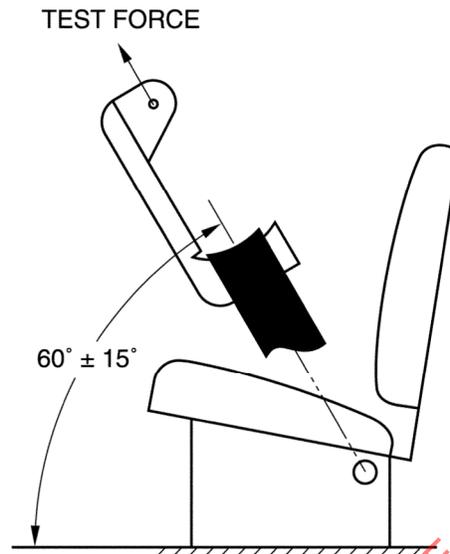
CONSTRUCTION AND GENERAL PURPOSE INDUSTRIAL MACHINES TEST PROCEDURE
